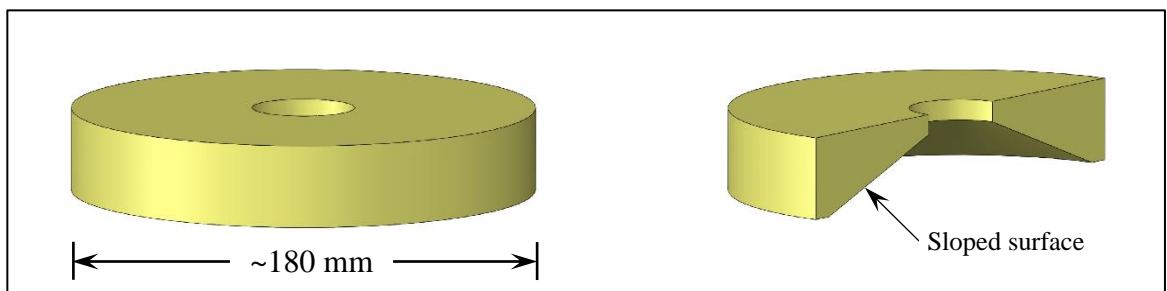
Passive float trim ring with sectioned view indicating the sloped surface
